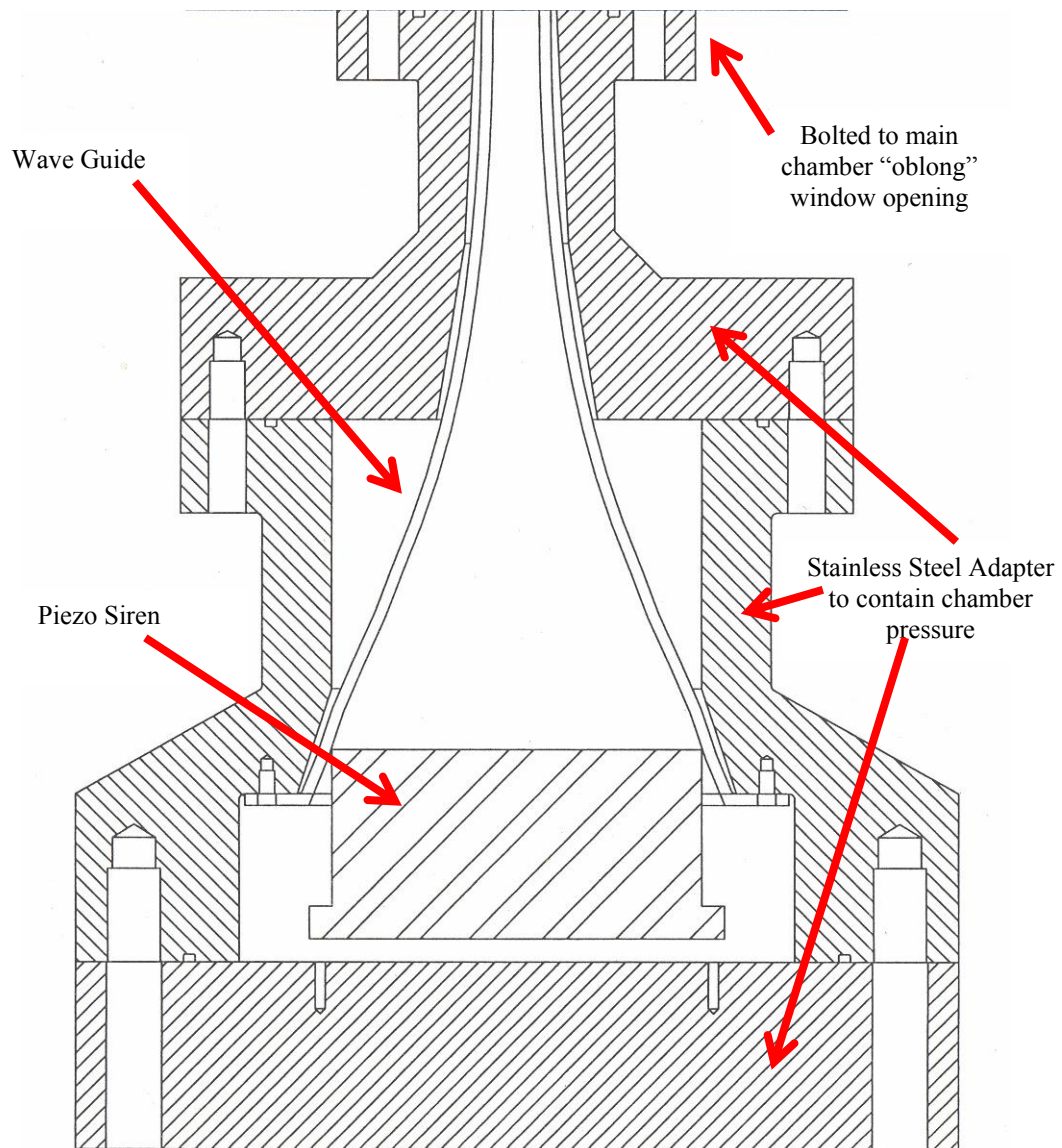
Plan view cross-section drawing of acoustic driver housing, wave guide, and assembly for attachment to main chamber.
